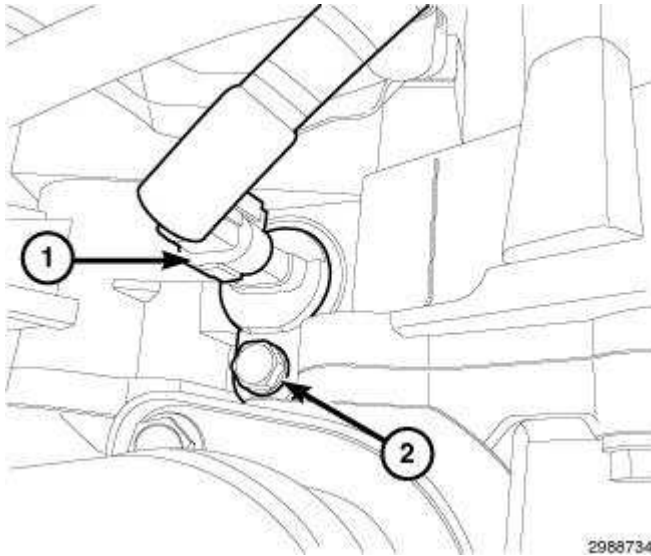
Camshaft Position Sensor Electrical Connector & Bolt
